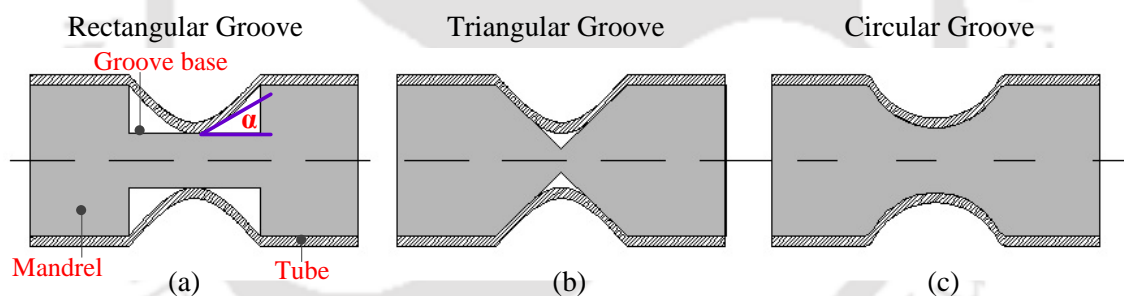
Types of groove geometry over the rod for EM crimping process
